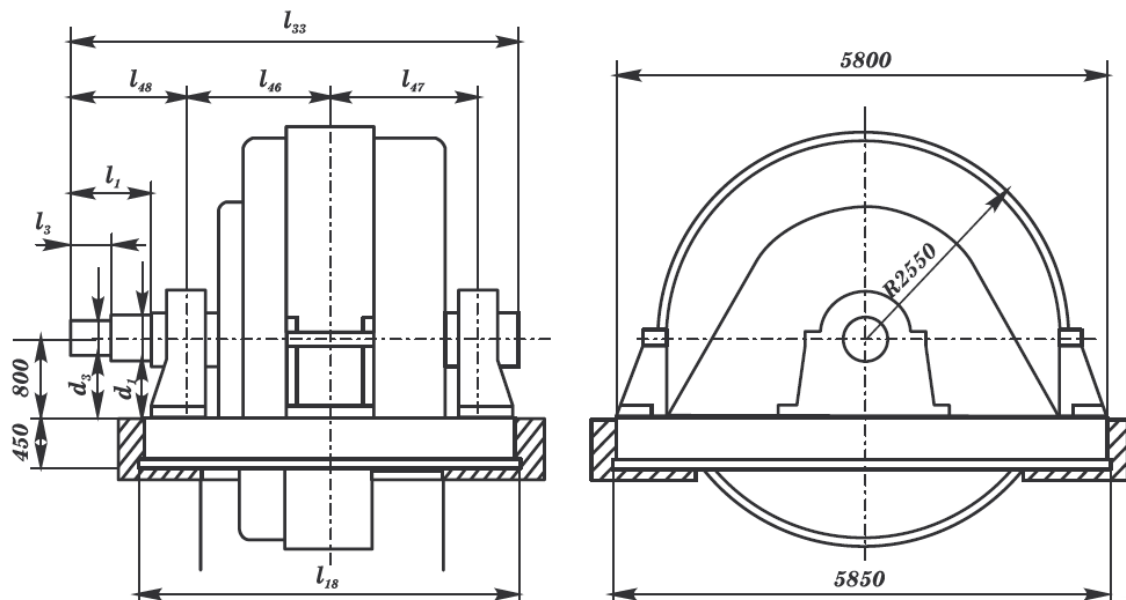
Overall and mounting dimensions and weight of motors with height of rotation axis 800 mm.
